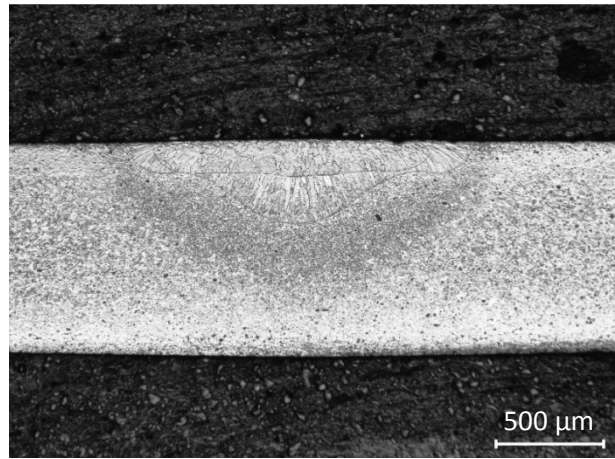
4th series of NiTi pulsed mode beads on plate – macrograph of weld bead #5
